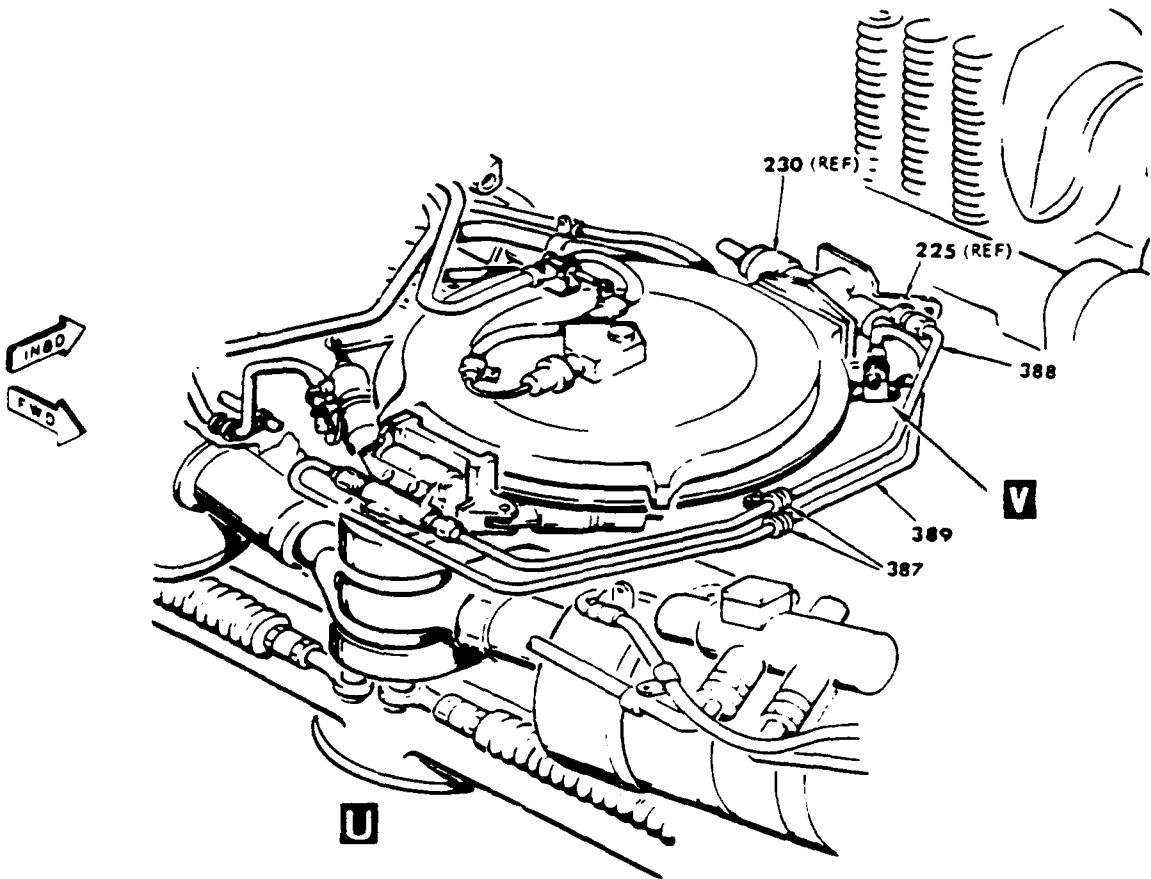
RH Aft Strut Assembly (Sheet 15 of 18)
